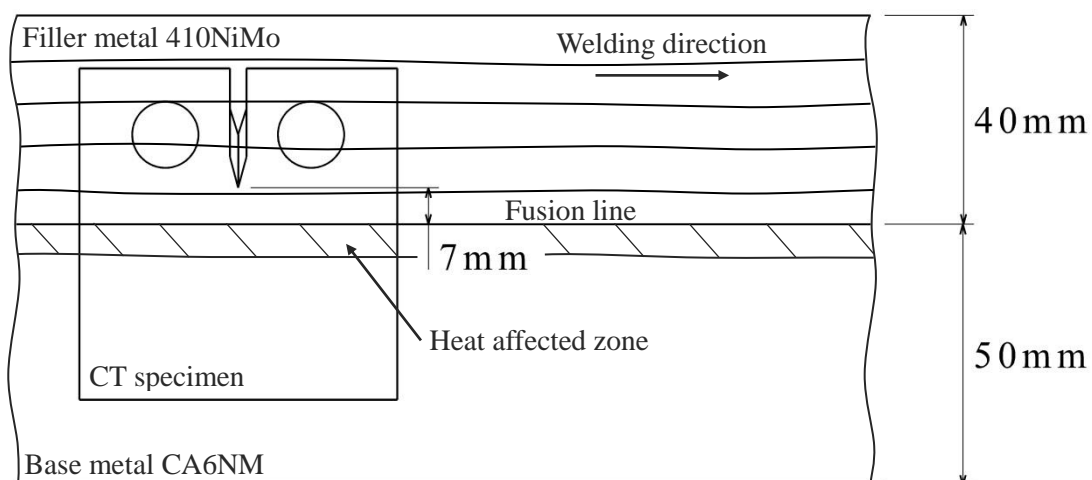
Compact tension specimen sampling layout. Starter notch aligned perpendicularly to the welding direction. Crack tip positioned at 7 mm from the fusion line in the FM.
